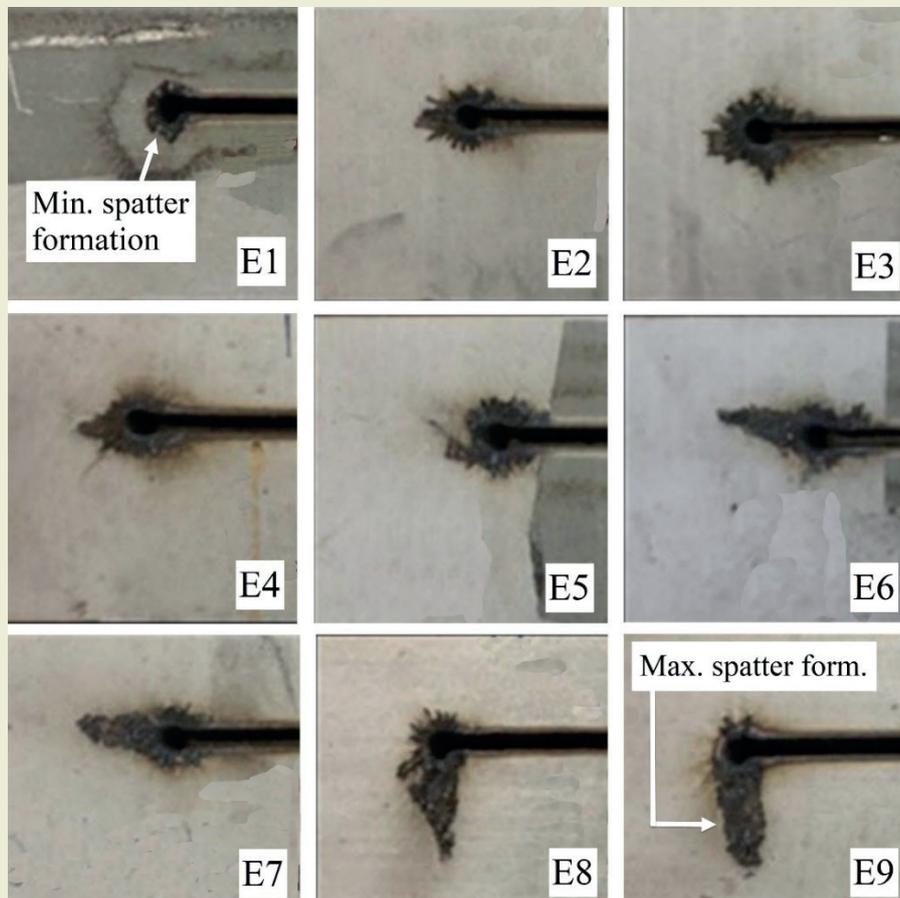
Top surface spatter formation after cutting on 8 mm thick plate
